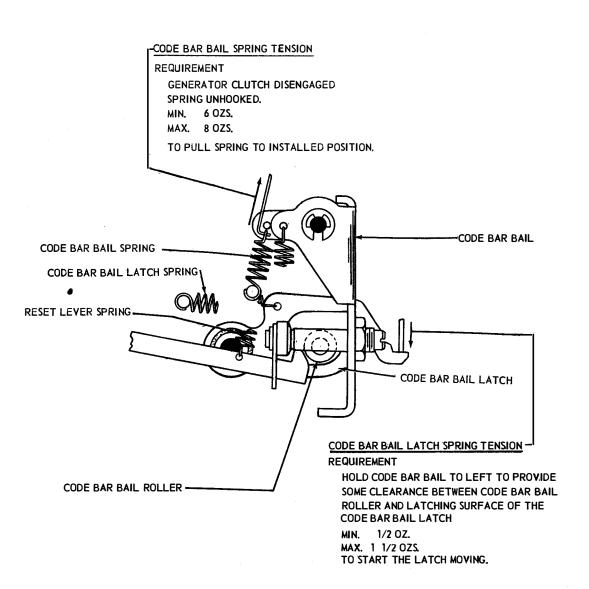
KEYBOARD, CODE BAR BAIL, FRONT VIEW
